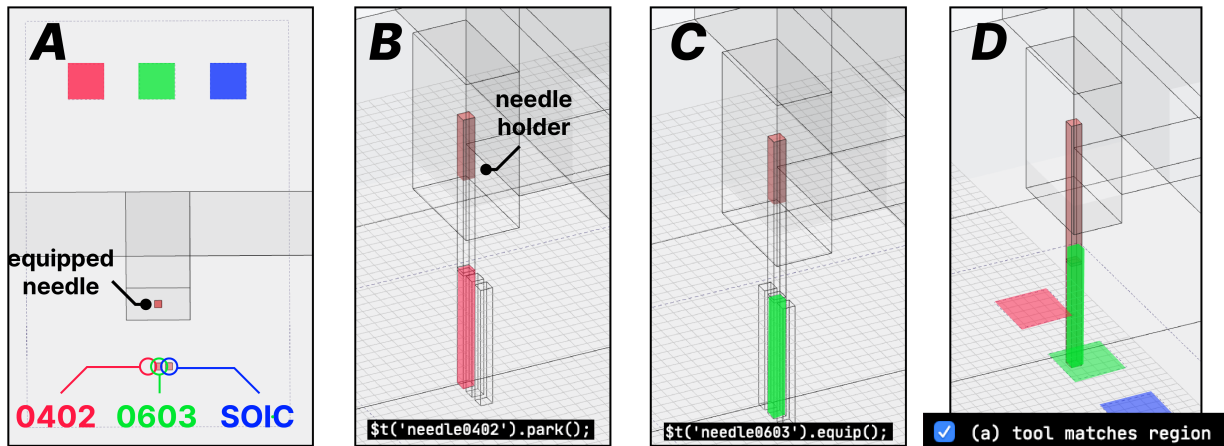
Verifying Correct Tool Configurations in the Pick and Place Machine. A) A bird’s-eye view of the pick and place machine’s setup with three differently sized needles for picking up SMD components of respective sizes (0402, 0603, and SOIC-8) and placing them on a PCB. At the bottom are three regions for parking each needle and at the top are three regions where each type of component is stored before being picked. B) The needle holder travels to the 0402 parking region and parks the needle there. C) The needle holder travels to the 0603 parking region and picks up that needle. D) The needle holder moves to the 0603 storage region successfully because the 0603 needle is currently equipped. If the needle had moved there before swapping needles, the “tool matches region” rule of thumb would have thrown an error because the needle would be incorrectly sized for picking up 0603 components.
